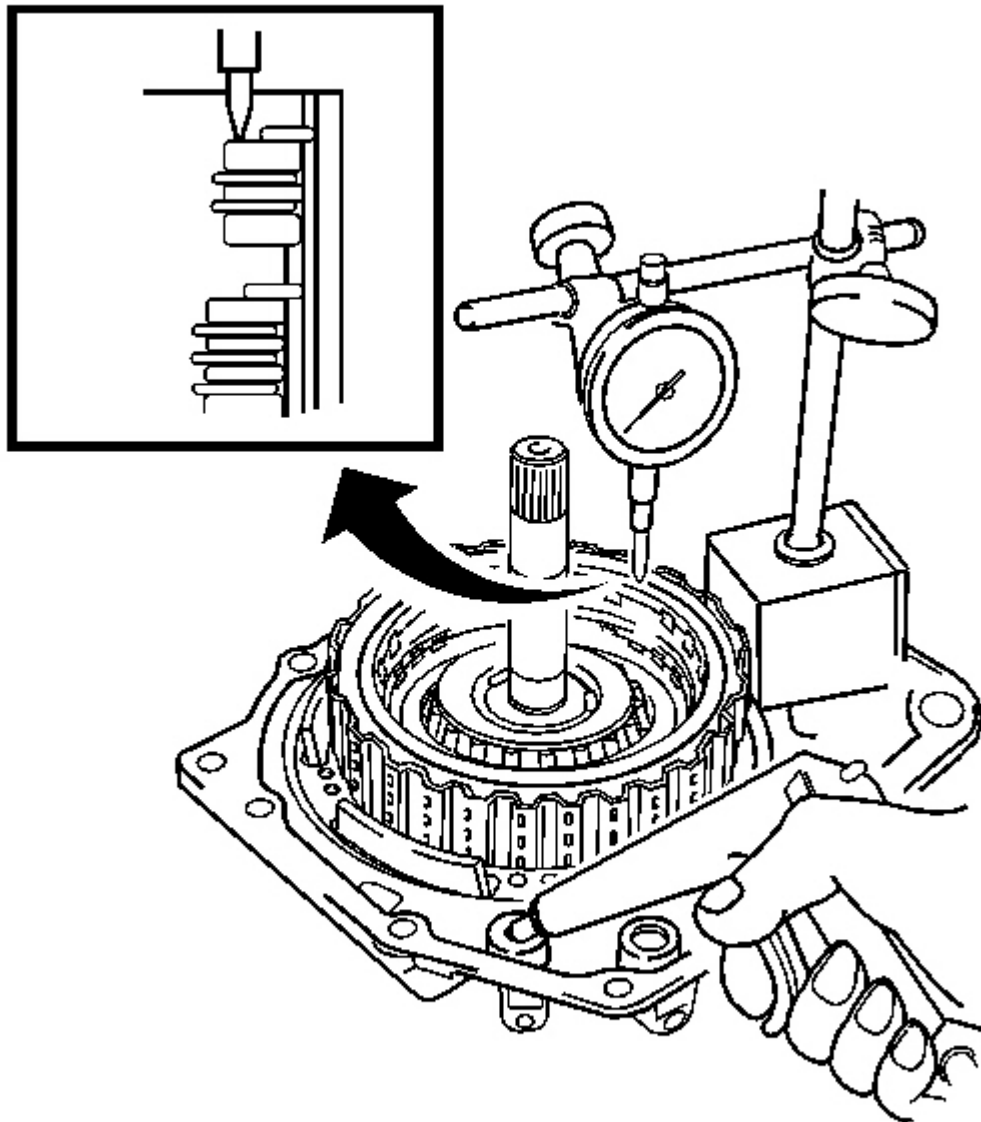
Measuring Reverse Clutch Pack Clearance While Applying Compressed Air
